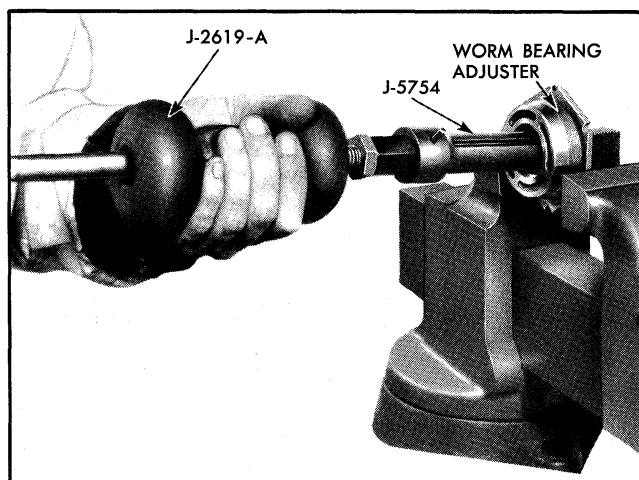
Removing Bearing Cup from Worm Bearing Adjuster
